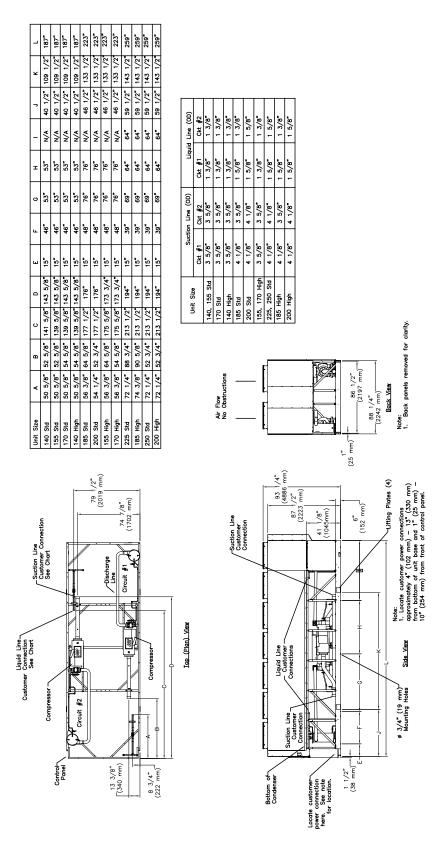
Unit Dimensions of Condenser/Compressor Unit for Remote Evaporator Option
